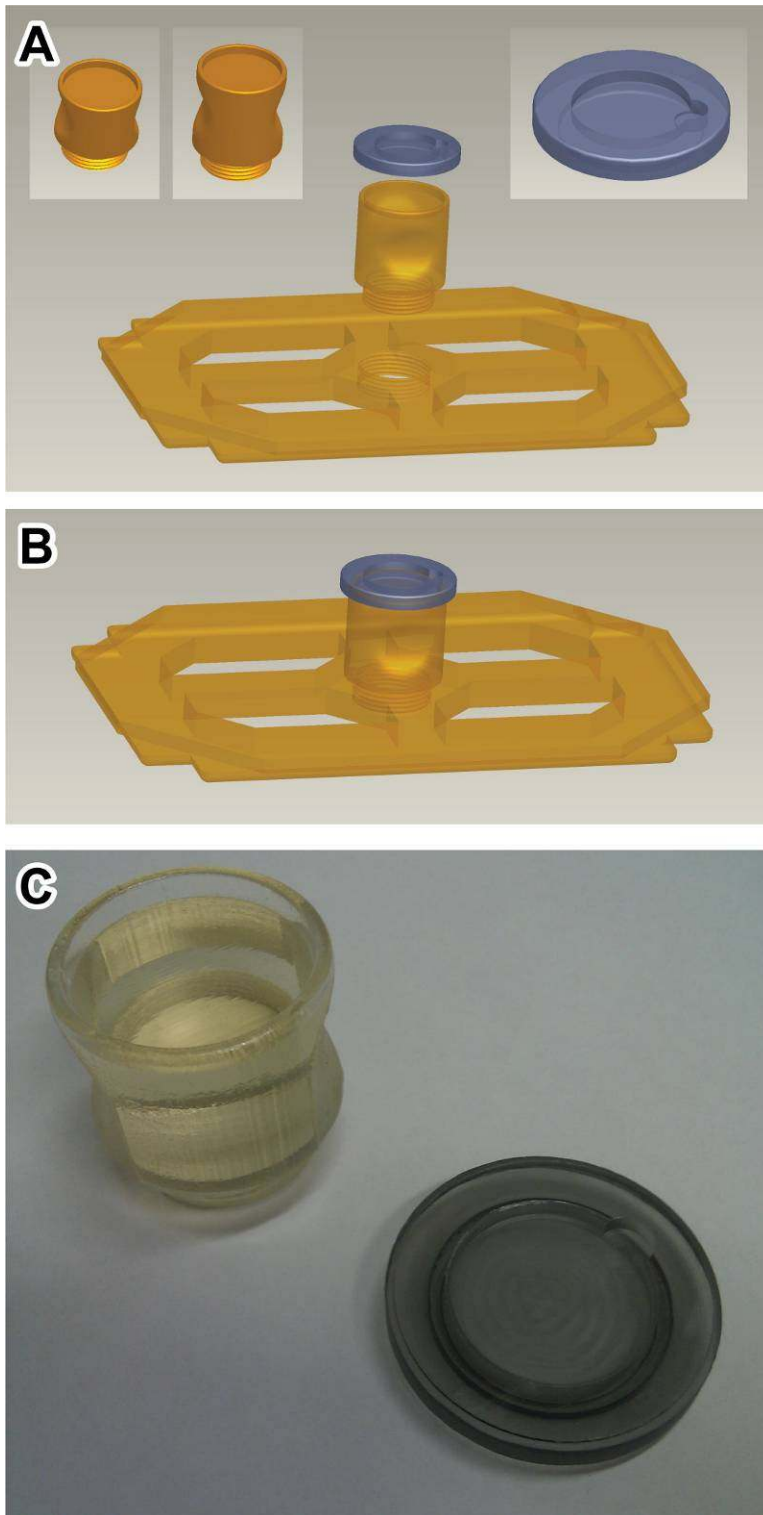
(A, B) CAD drawings of the unassembled and assembled injury chuck holder (orange pieces), and the injury chuck (blue piece). Bright-field photo of the injury chuck holder post (upper left) and the injury chuck (bottom right).
